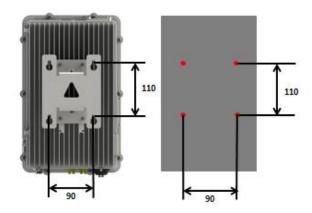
DU Anchor Bolt Assembly for Wall Installation
